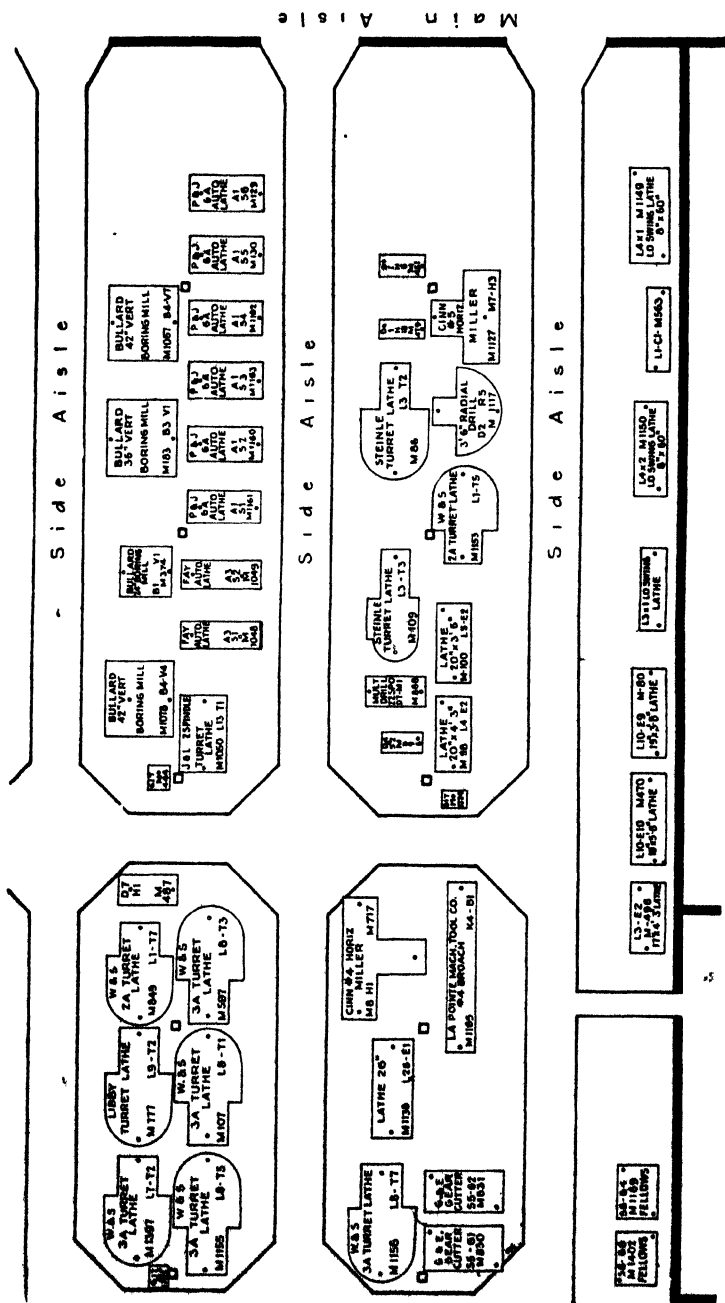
Cardboard templates show the proposed arrangement of equipment in a section of the manufacturing department. (Courtesy of the Caterpillar Tractor Company.)
